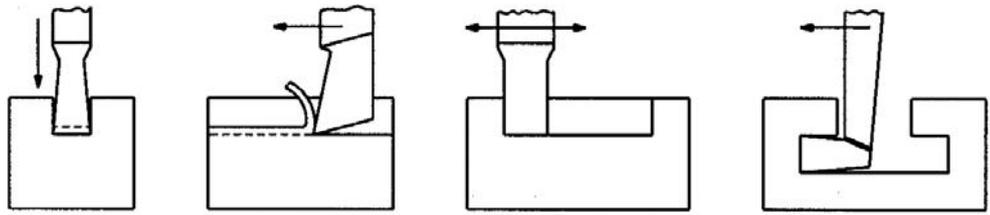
Machining of flat surfaces in shaping machines
